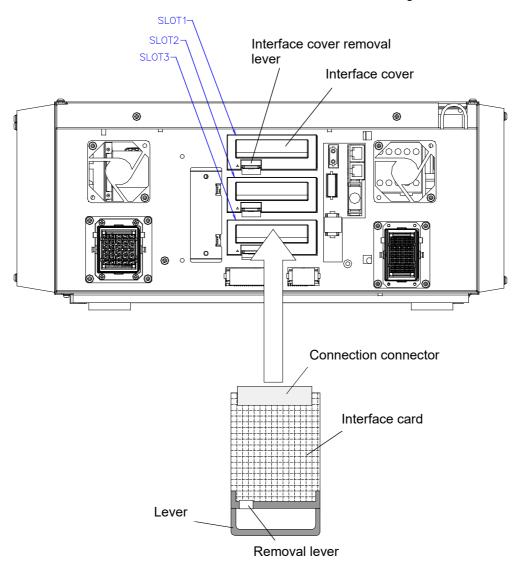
Mounting of the CC-Link interface card (CR2D controller)
